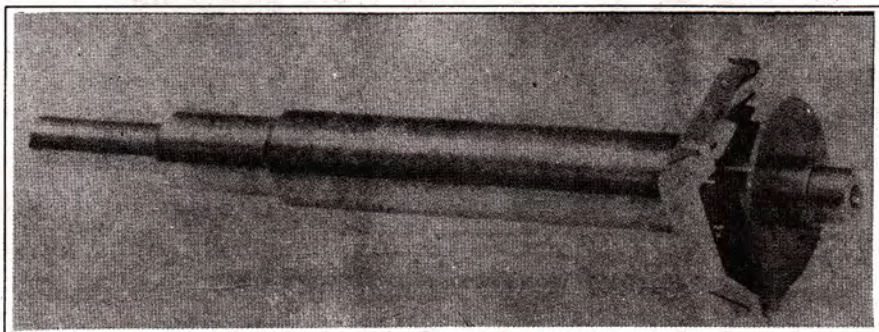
Centrifugal device mounted on the rotor shaft.
